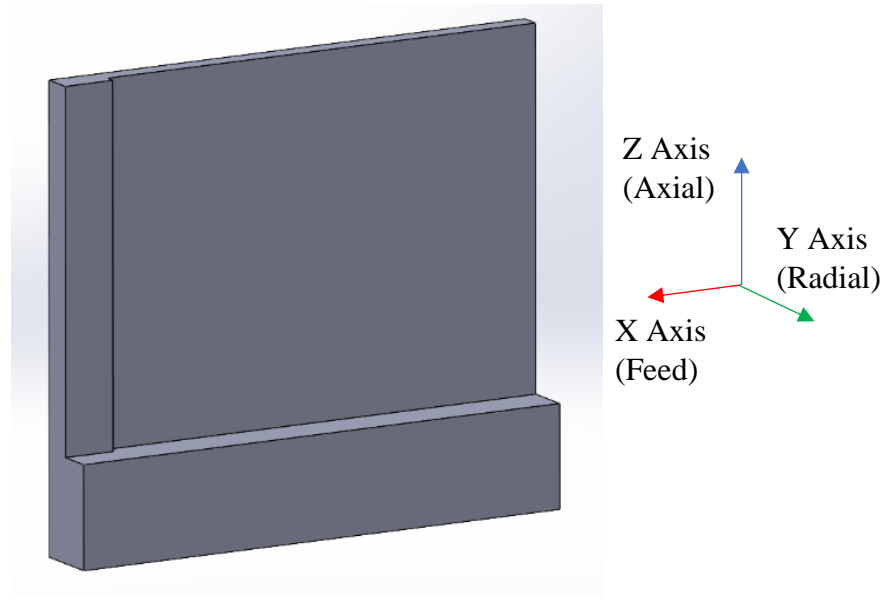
CAD model of 3 mm thick workpiece, undergoing 1 mm radial peripheral milling operation (45 mm of cutter engagement in feed direction)
